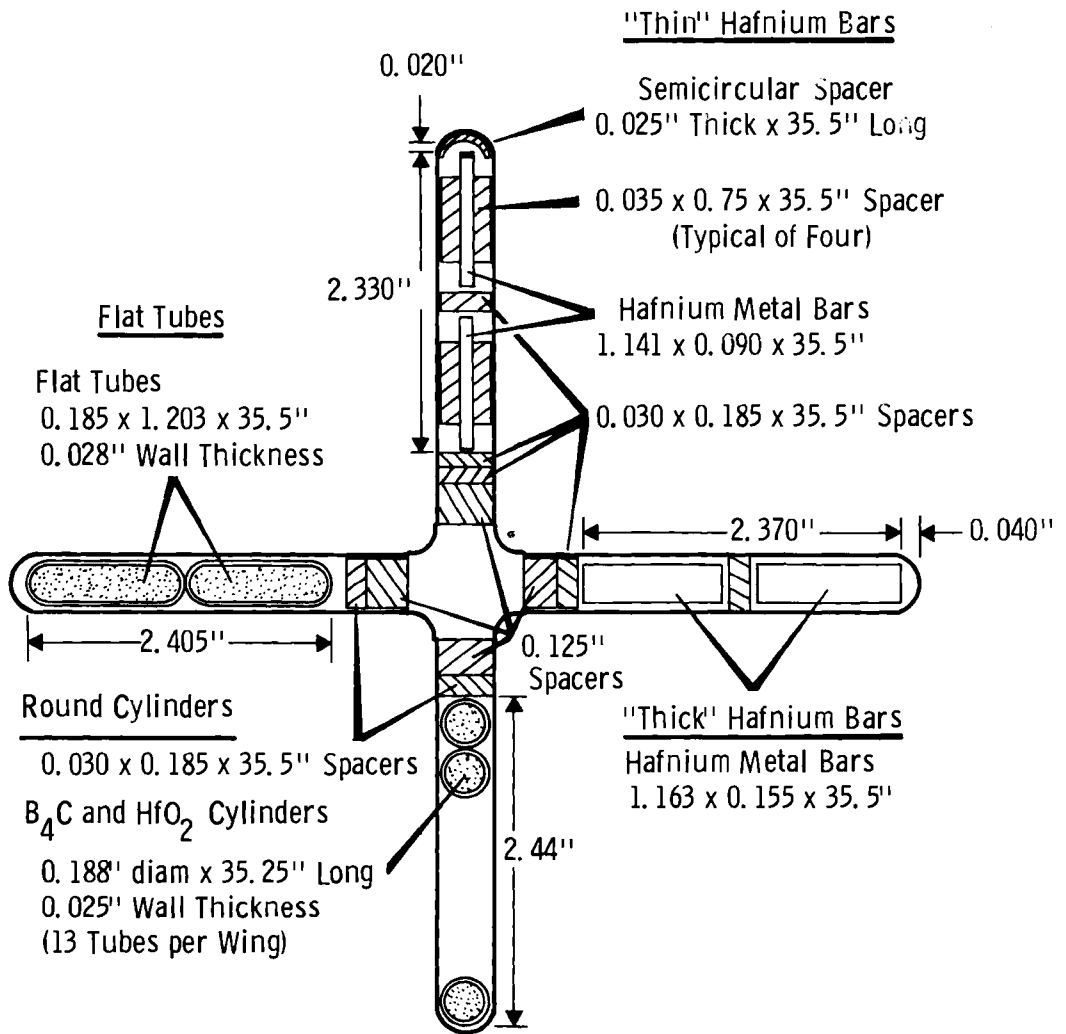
TEST CRUCIFORM BLADE-LOADING DETAILS
